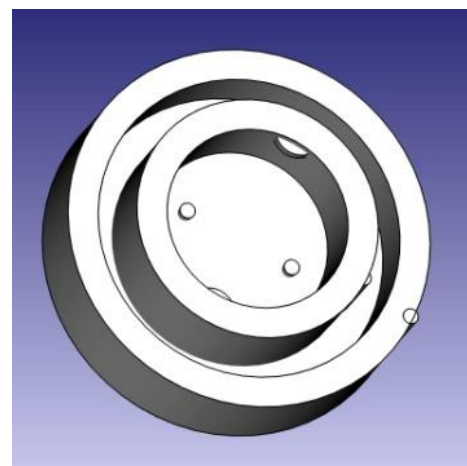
Bottom part of LuminoSiPM; the bay for disposable sample-holders.
